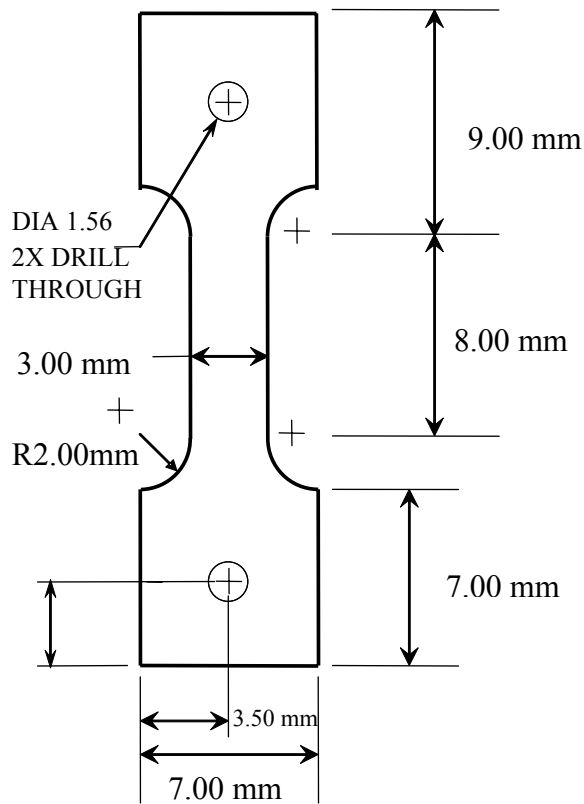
A schematic showing the dimensions of the tension test samples.
